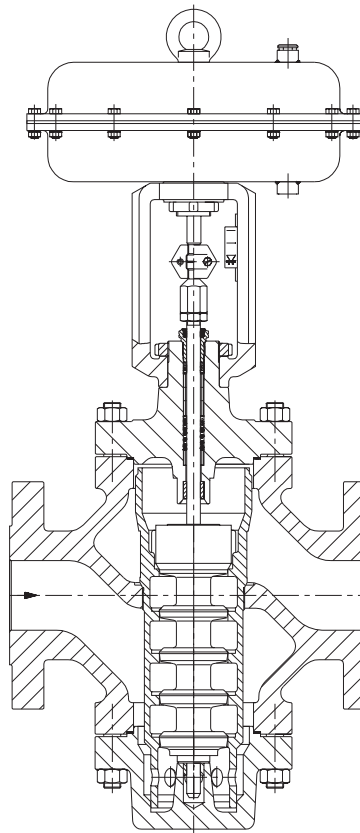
· Type 3255 Globe Valve with 5-Stage Axial Plug
